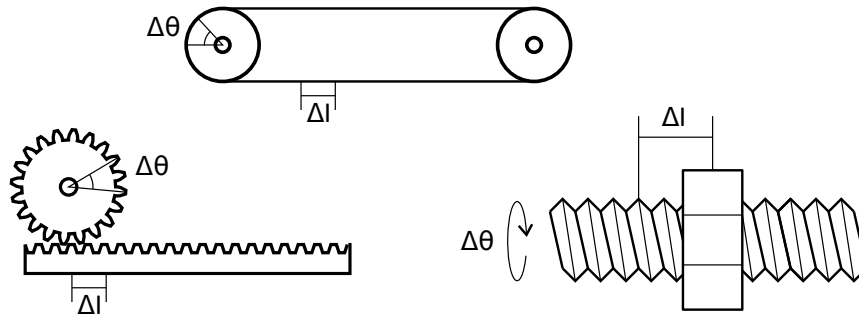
Some mechanisms that enable rotary to linear motion conversion, from left to right: rack and pinion, drive belt and screw-nut mechanism.
